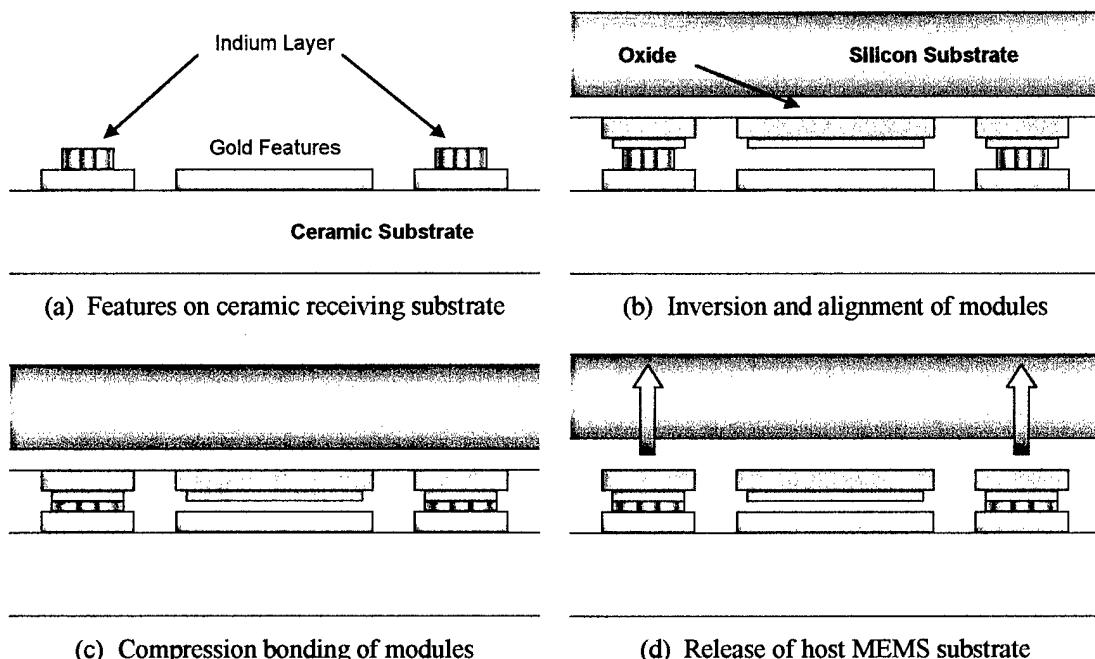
Simplified illustration of a general flip-chip assembly technique.
